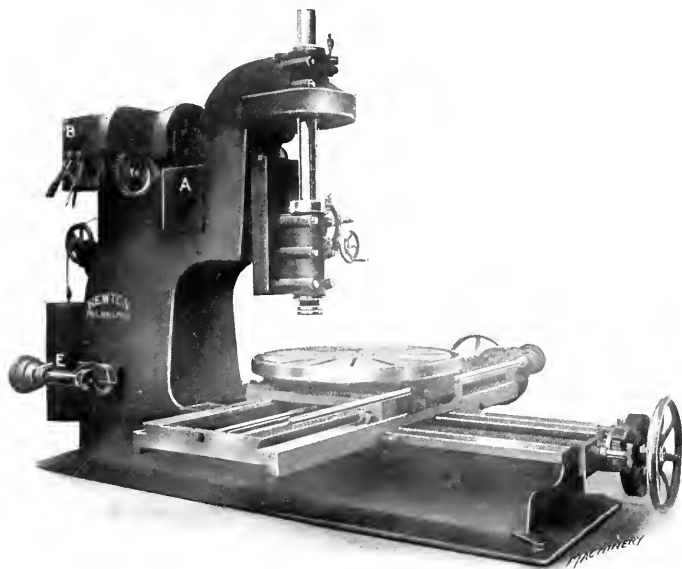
Left-hand Side of Newton Die-sinking Machine
